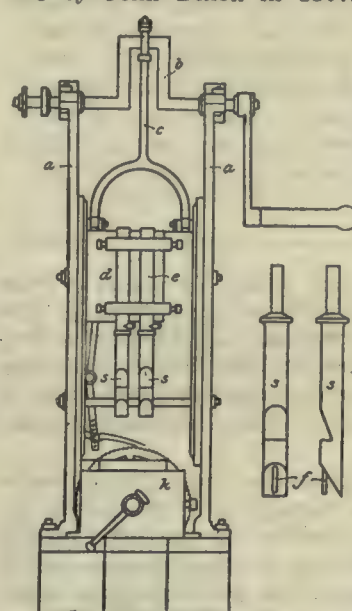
MORTISING MACHINE OF BRUNEL 1801
